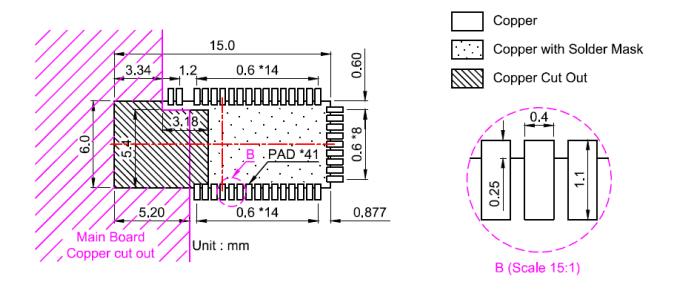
PCB Layout Guide (ISBLE1506-A51xxxxxA)
